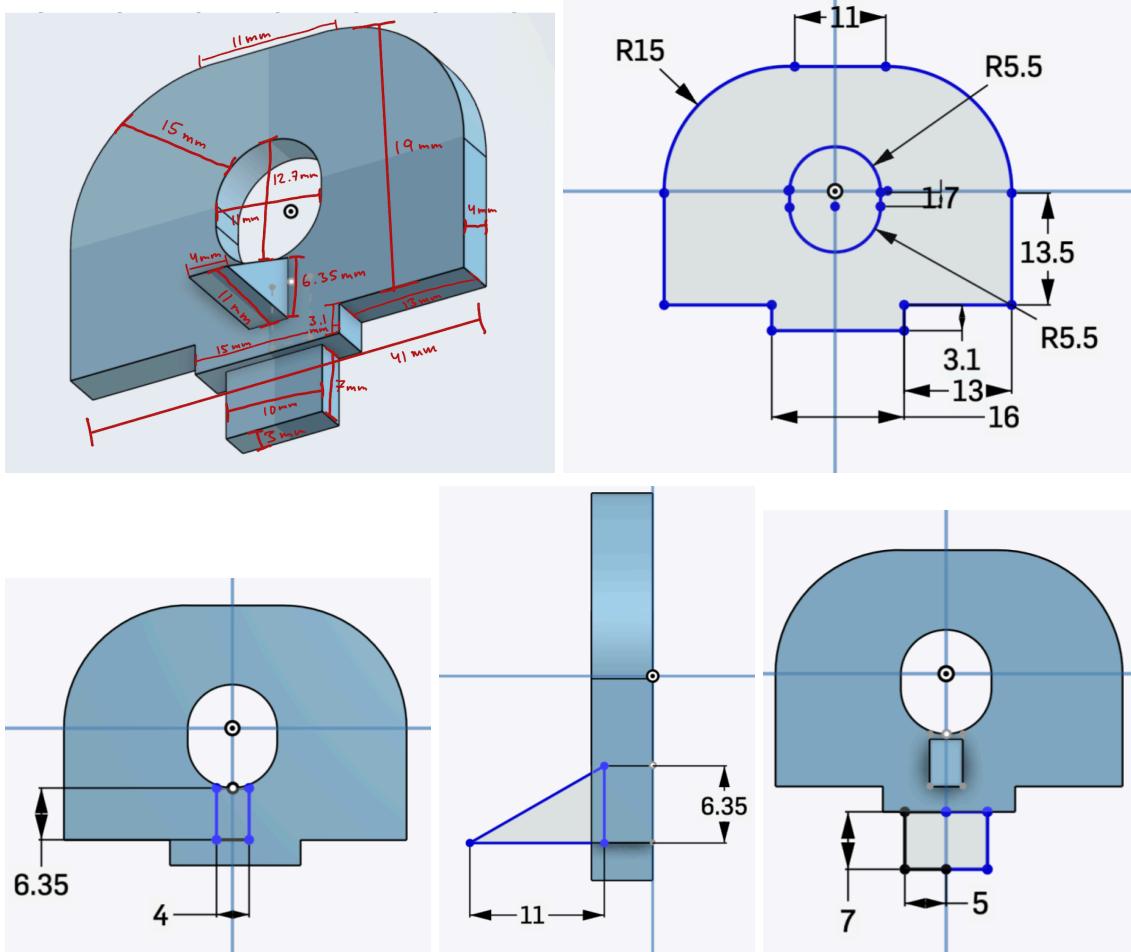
Onshape Tube Holder [LINK](#) We printed two of these.
